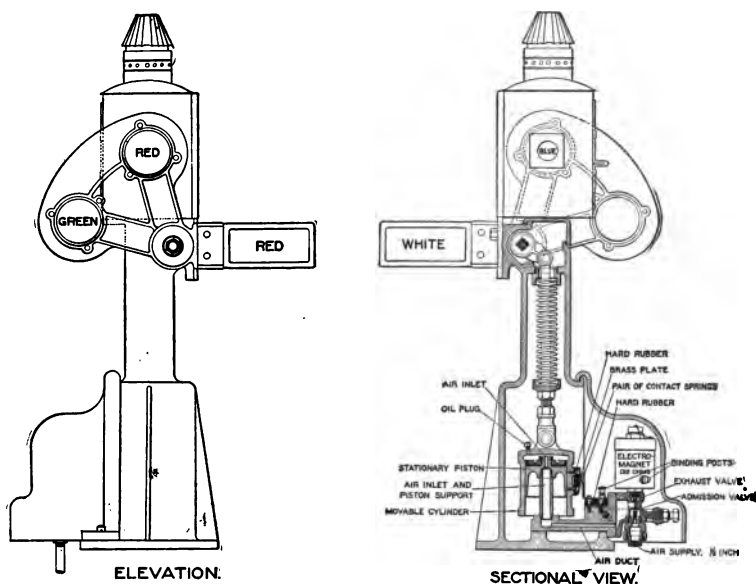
ELECTRO-PNEUMATIC DWARF SIGNAL FOR "DRILL" OR "SHUNT" MOVEMENTS, SHOWING OPERATING MECHANISM.
